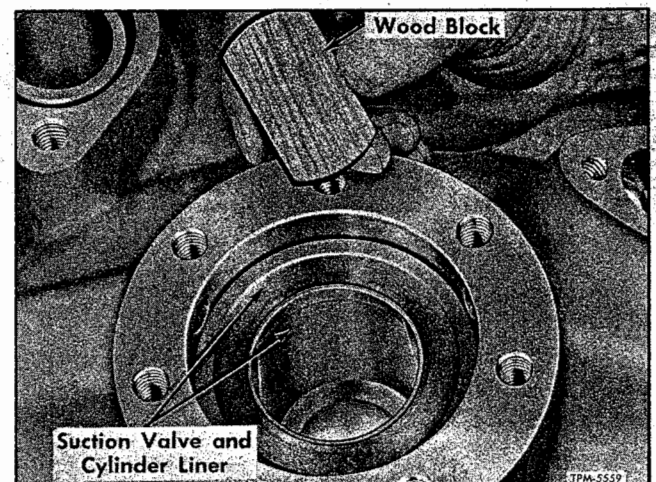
Wood Block Used for Removal of Suction Valve and Cylinder Liner
